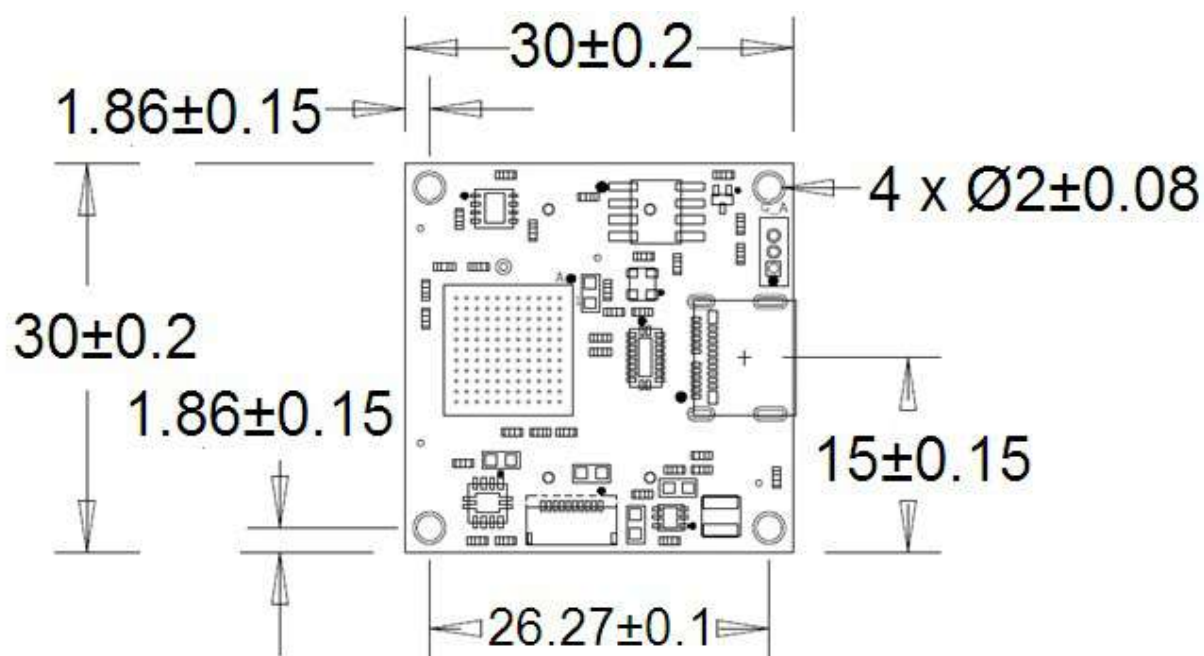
Rear Portion of See3CAM_CU135 Base Board Mechanical Dimensions
